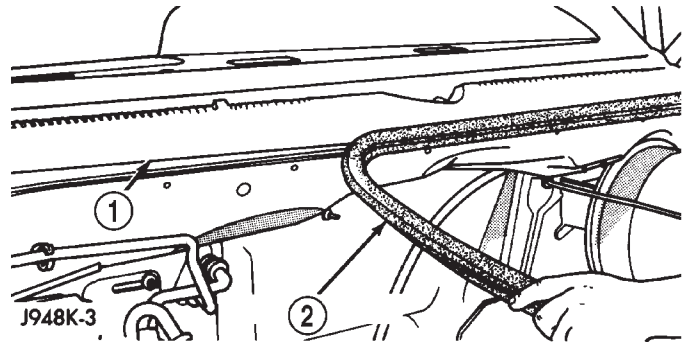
Cowl Plenum Cover/Grille Panel Weatherstrip
